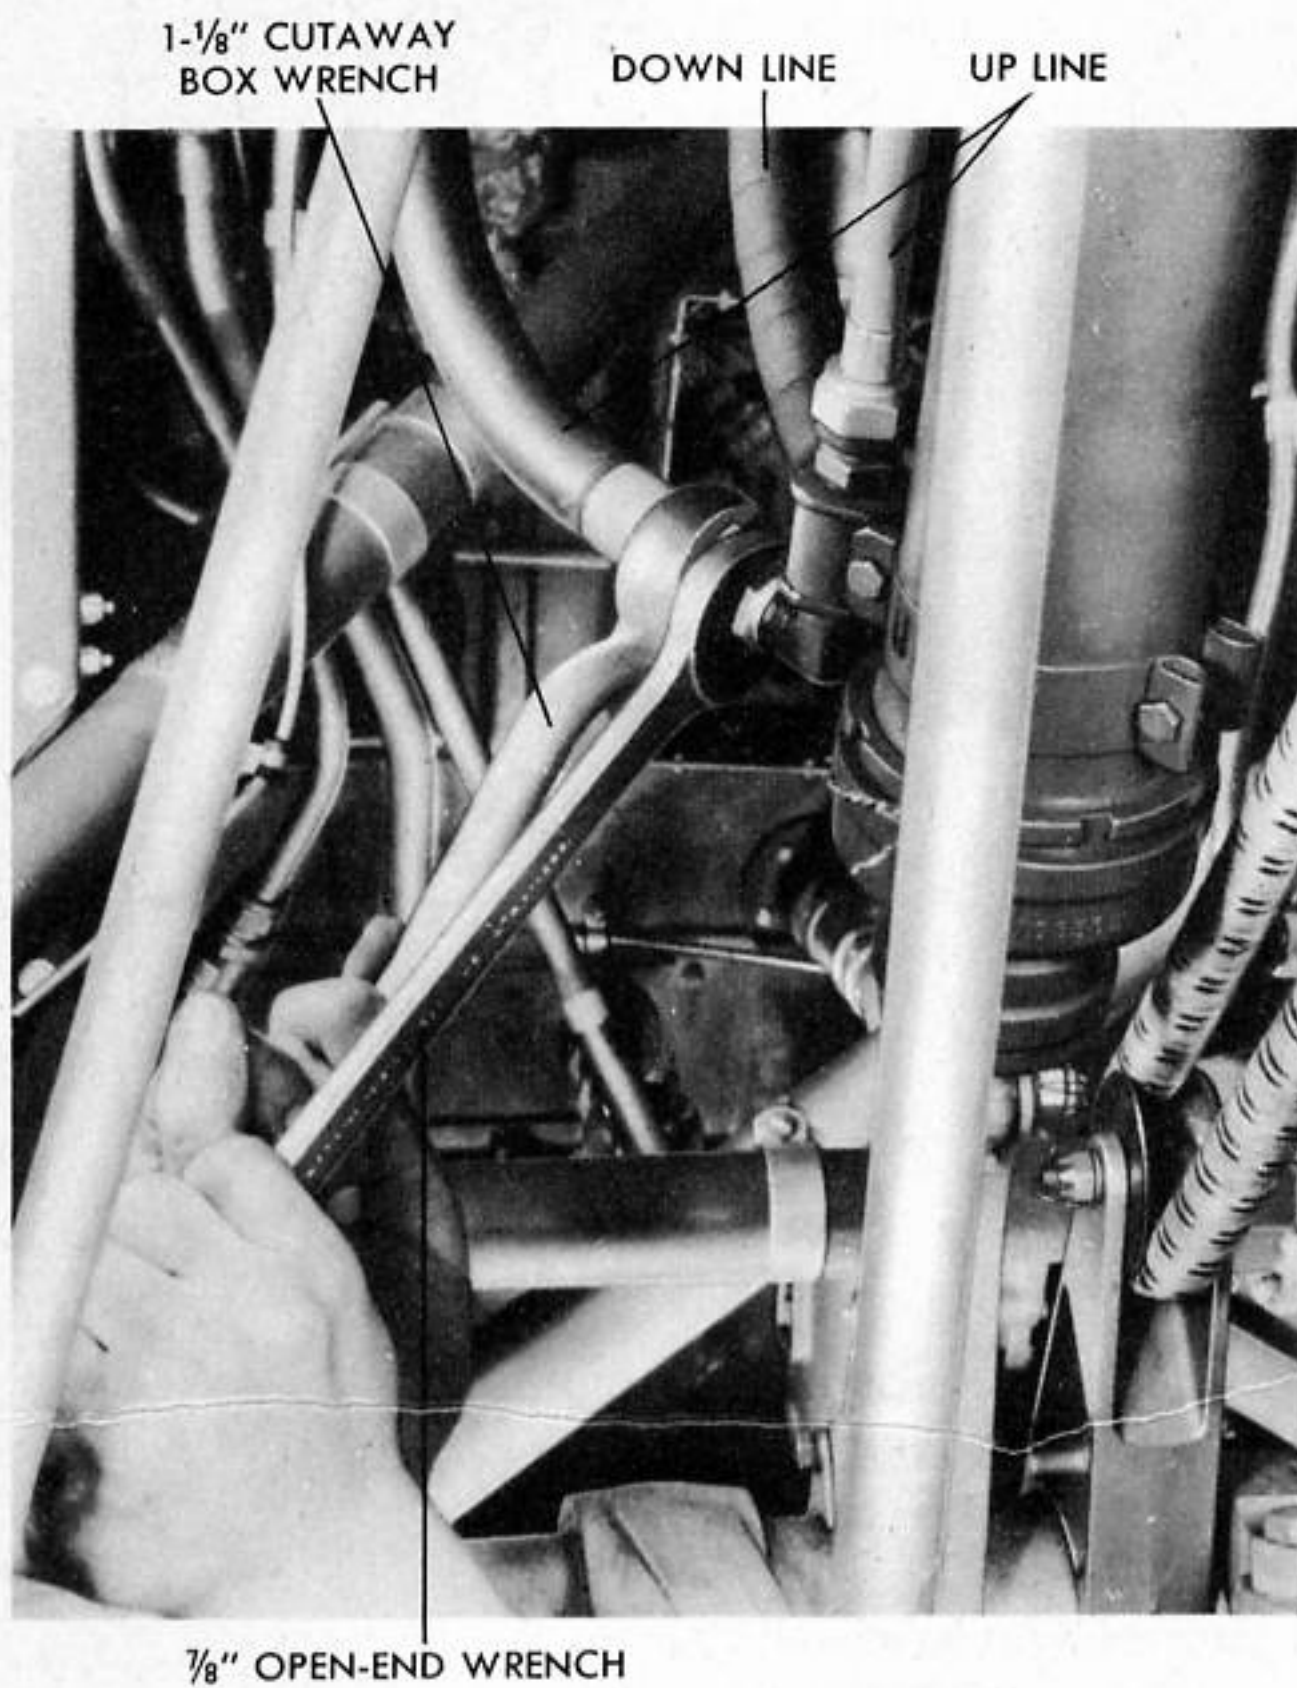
REMOVING MAIN ALIGHTING GEAR ACTUATING STRUT
